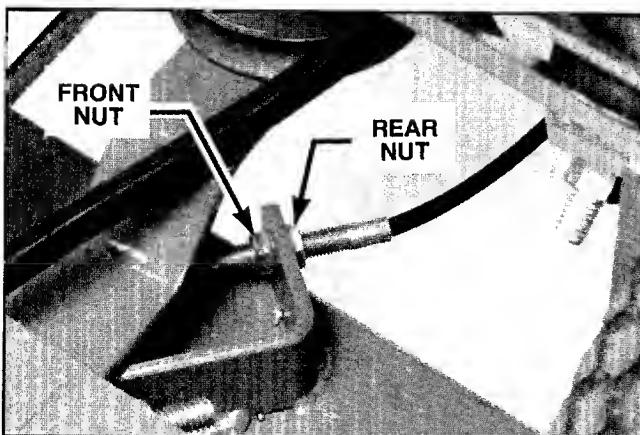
Location of jam nuts on blade drive control cable (traction drive mounting bracket removed for photo clarity only).
